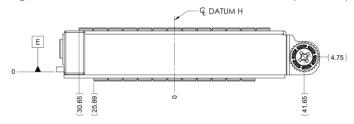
SFF OCP NIC 3.0 Card with Pull Tab CTF Dimensions (Side View)
